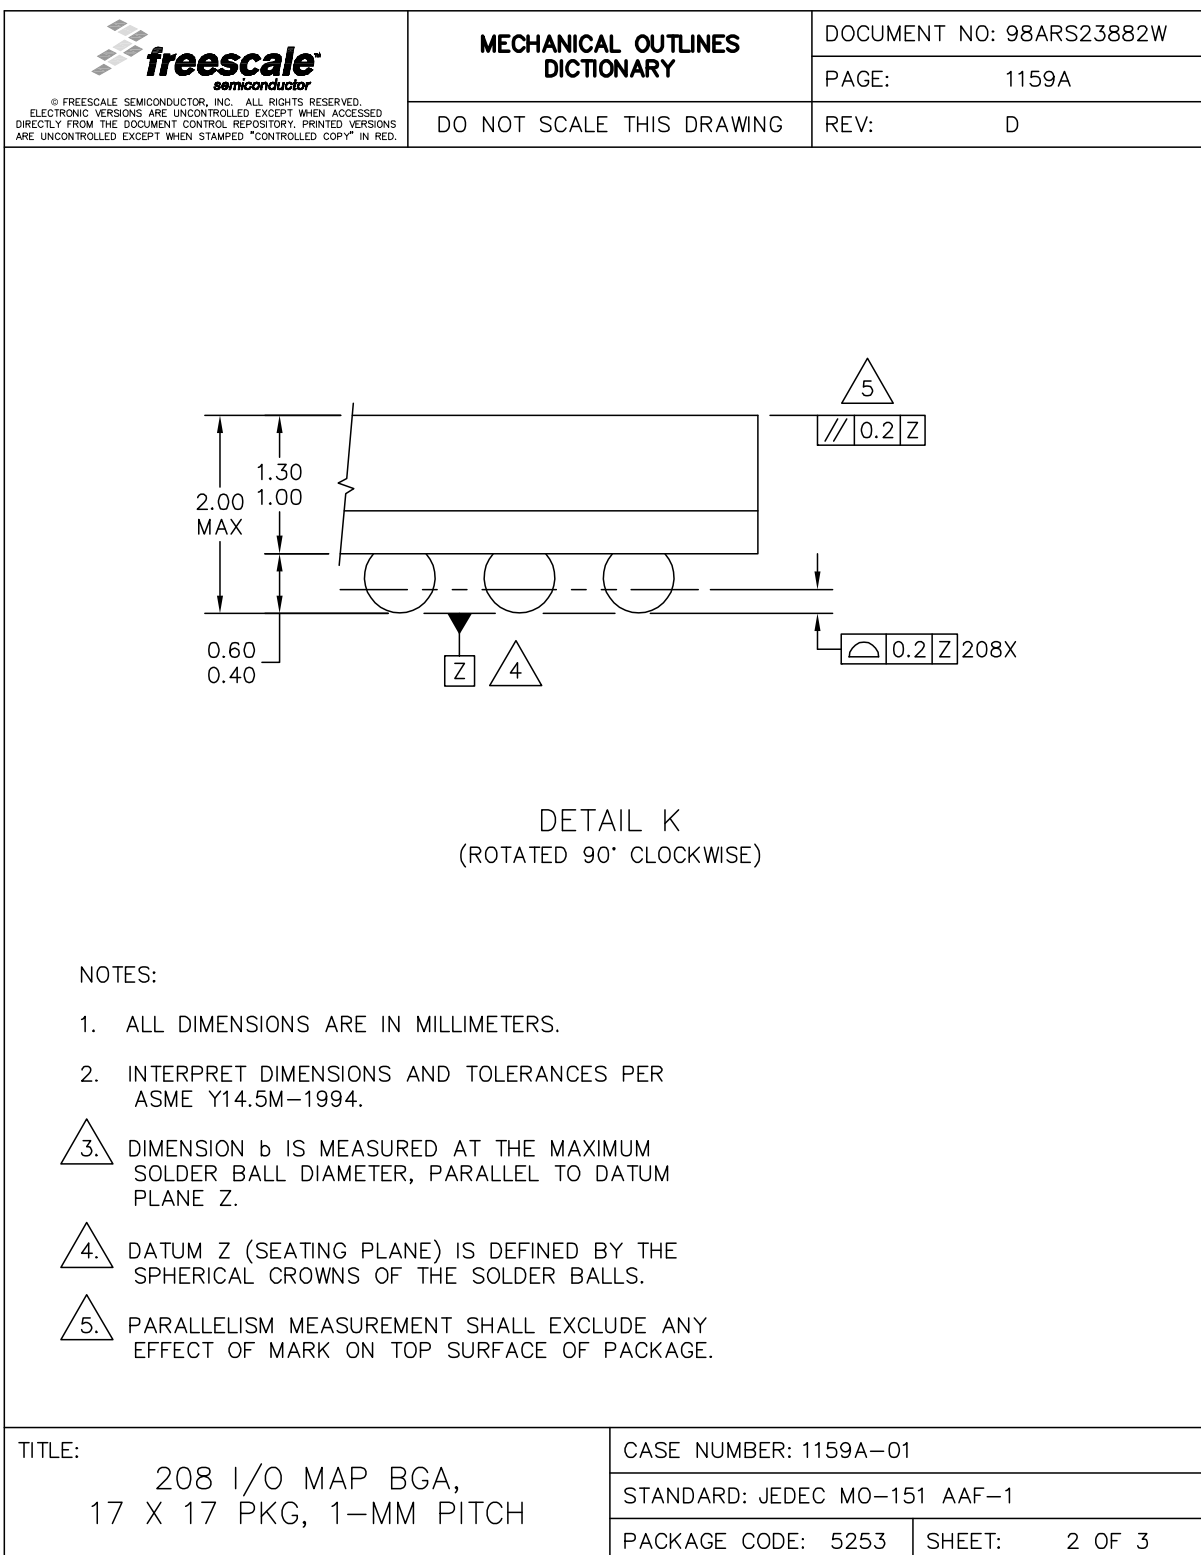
208 MAPBGA package mechanical drawing (part 2)
